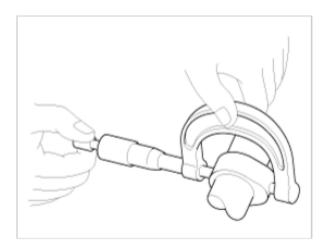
Measuring Cam Height Using Micrometer Courtesy of HYUNDAI MOTOR AMERICA
